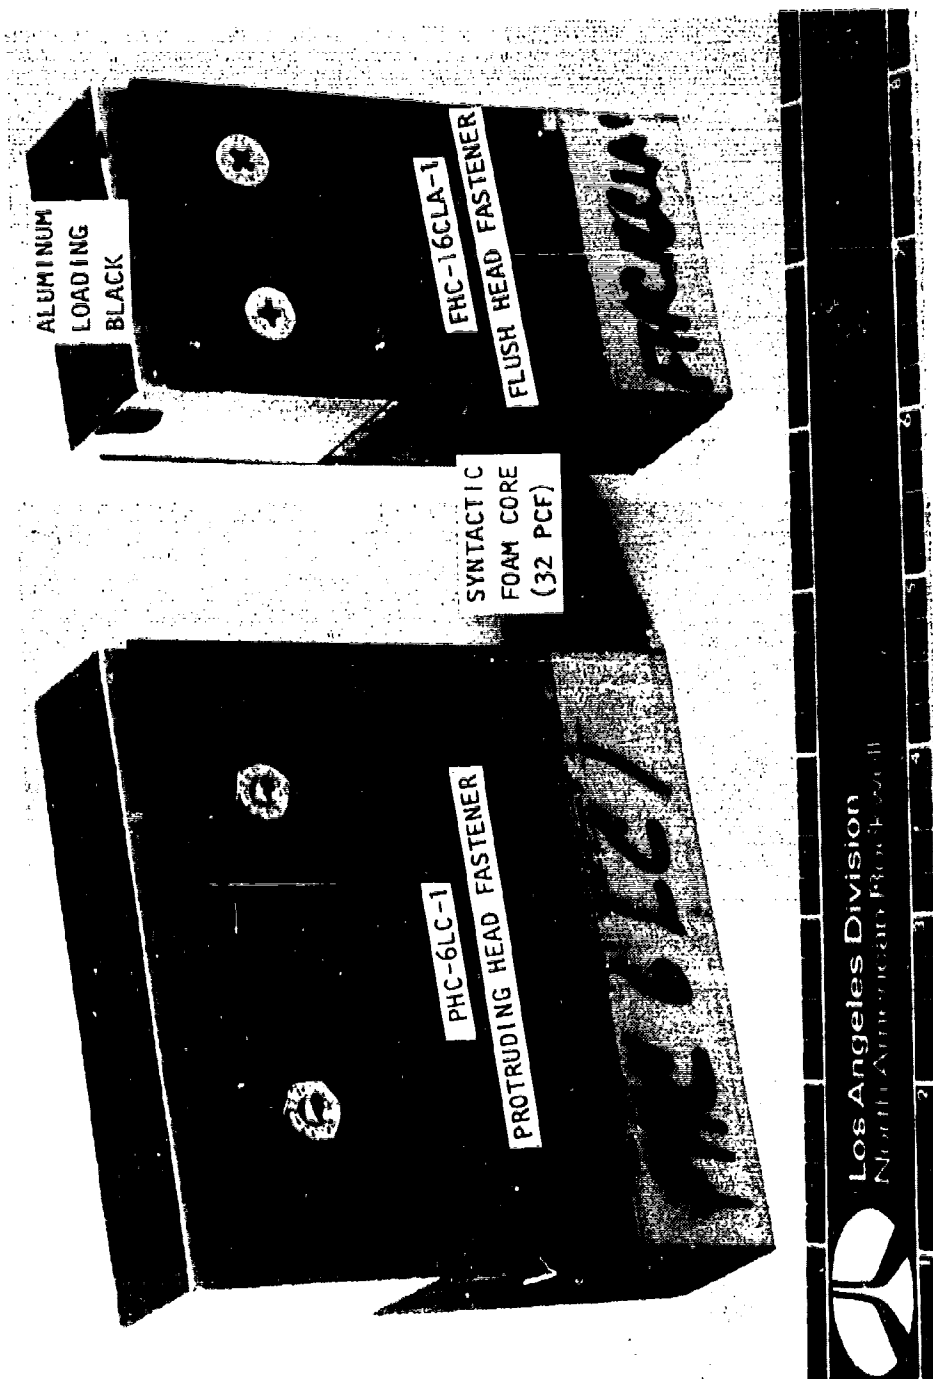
Compression Graphite/Epoxy Mechanical Joint Test Specimen Setup (Protruding Head and Flush Head Fasteners)
